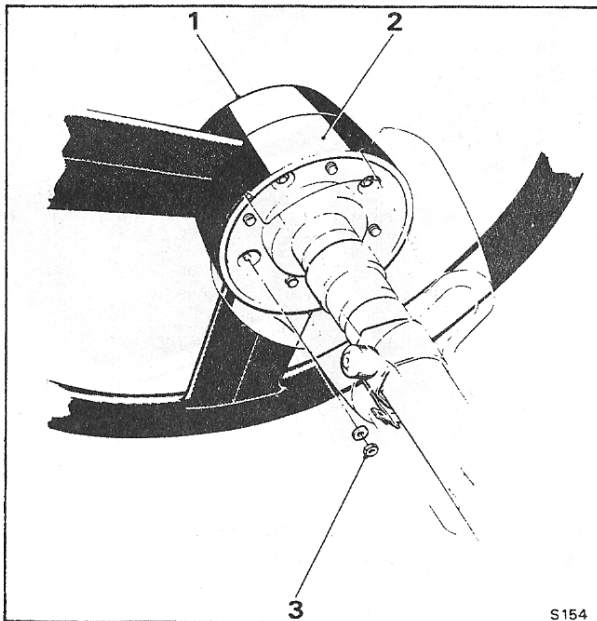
Horn button removal. Prior to car serial numbers Corniche 32633 Camargue 32035
